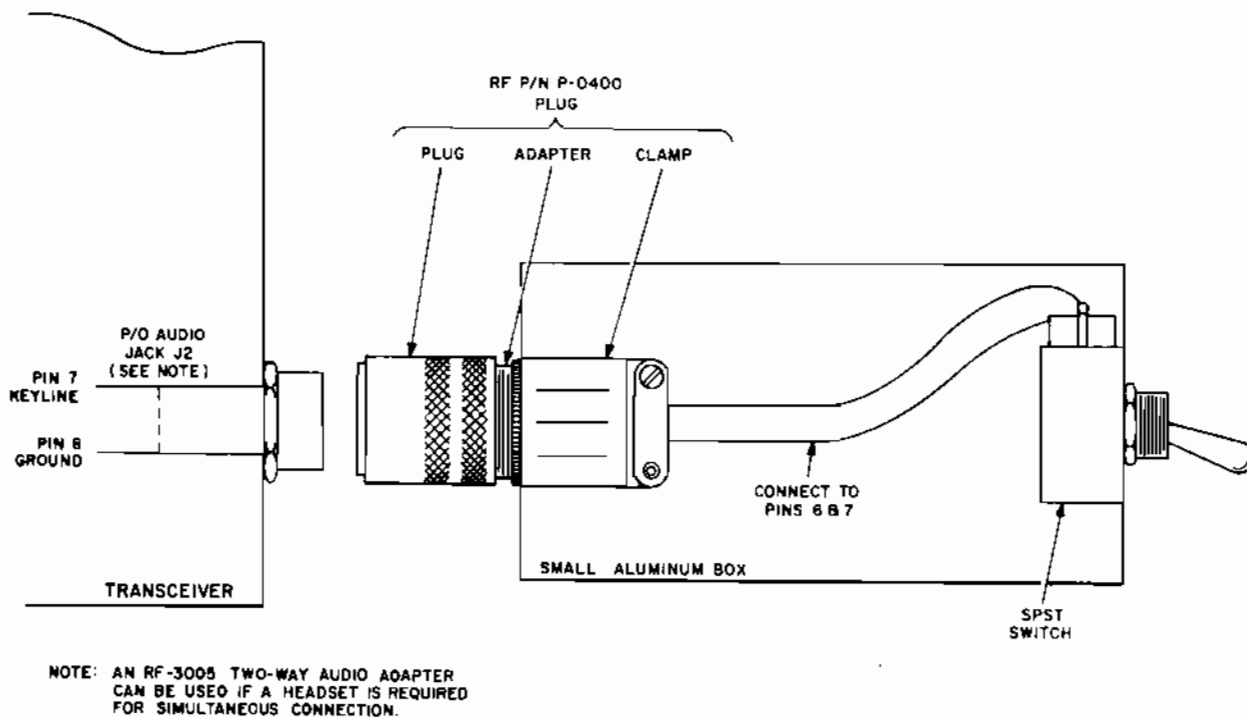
FABRICATED KEYING TEST FIXTURE
